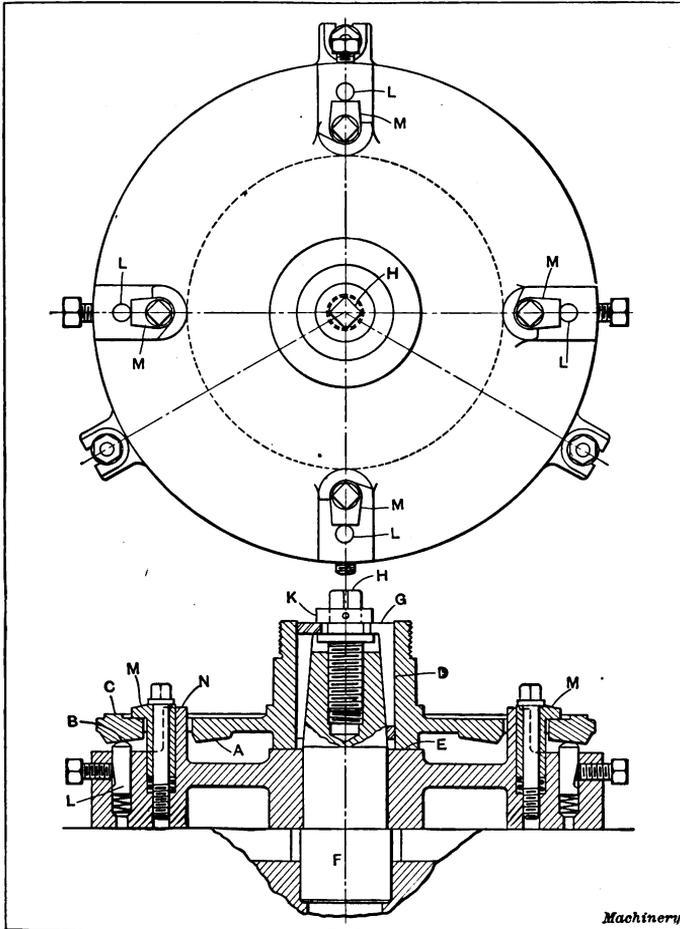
Vertical Boring Mill Fixture for Special Design of Bevel Gear
